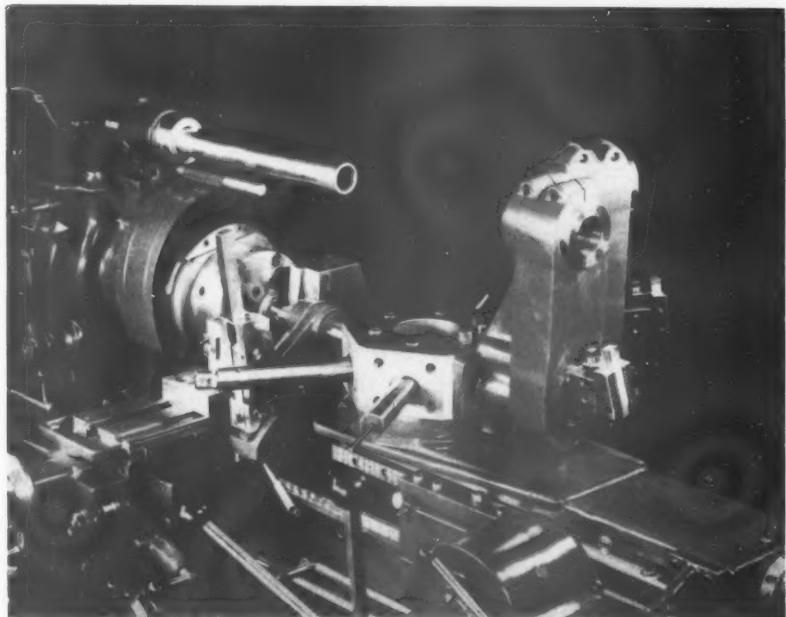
Figure IV. Machining eccentric surfaces on oil pump covers chucked by automatic air indexing fixture on Gisholt No. 3 universal.
